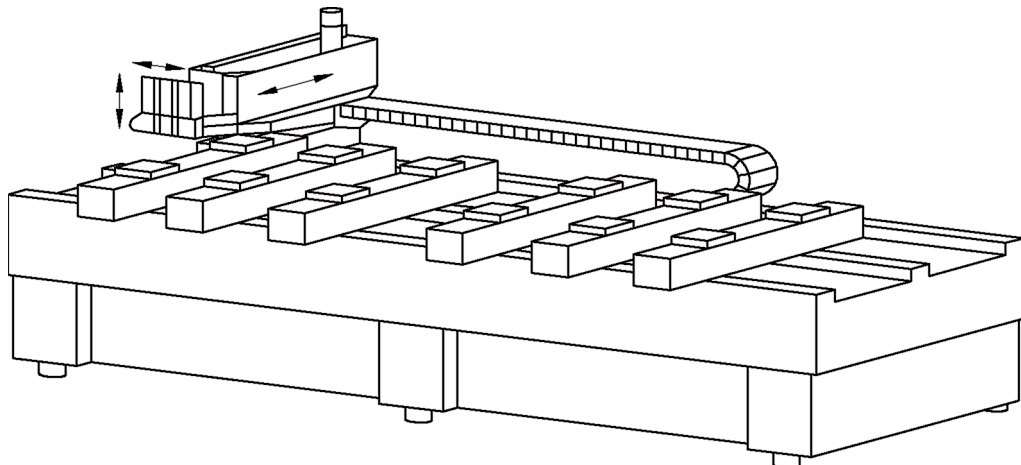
Example of a C frame machine with fixed table and moving machining head
